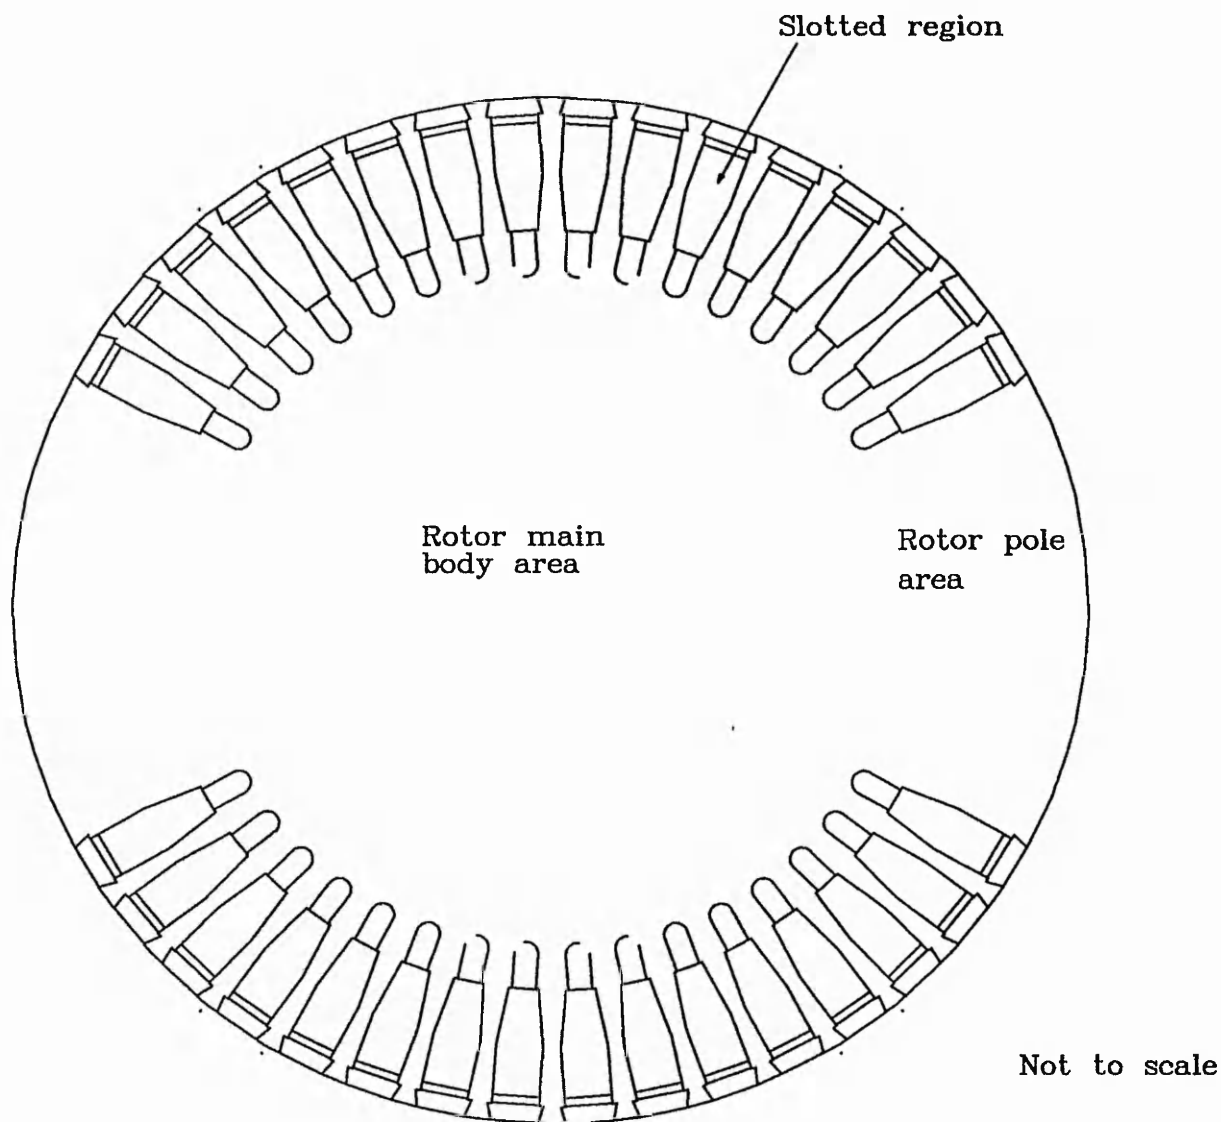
A typical rotor cross-section for a large two pole synchronous machine
